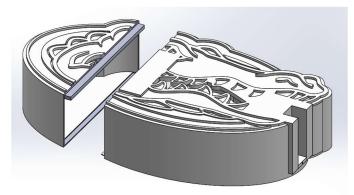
Body with alignment extrusions between the upper and lower body pieces. Tolerances finalized at 0.25 mm.
